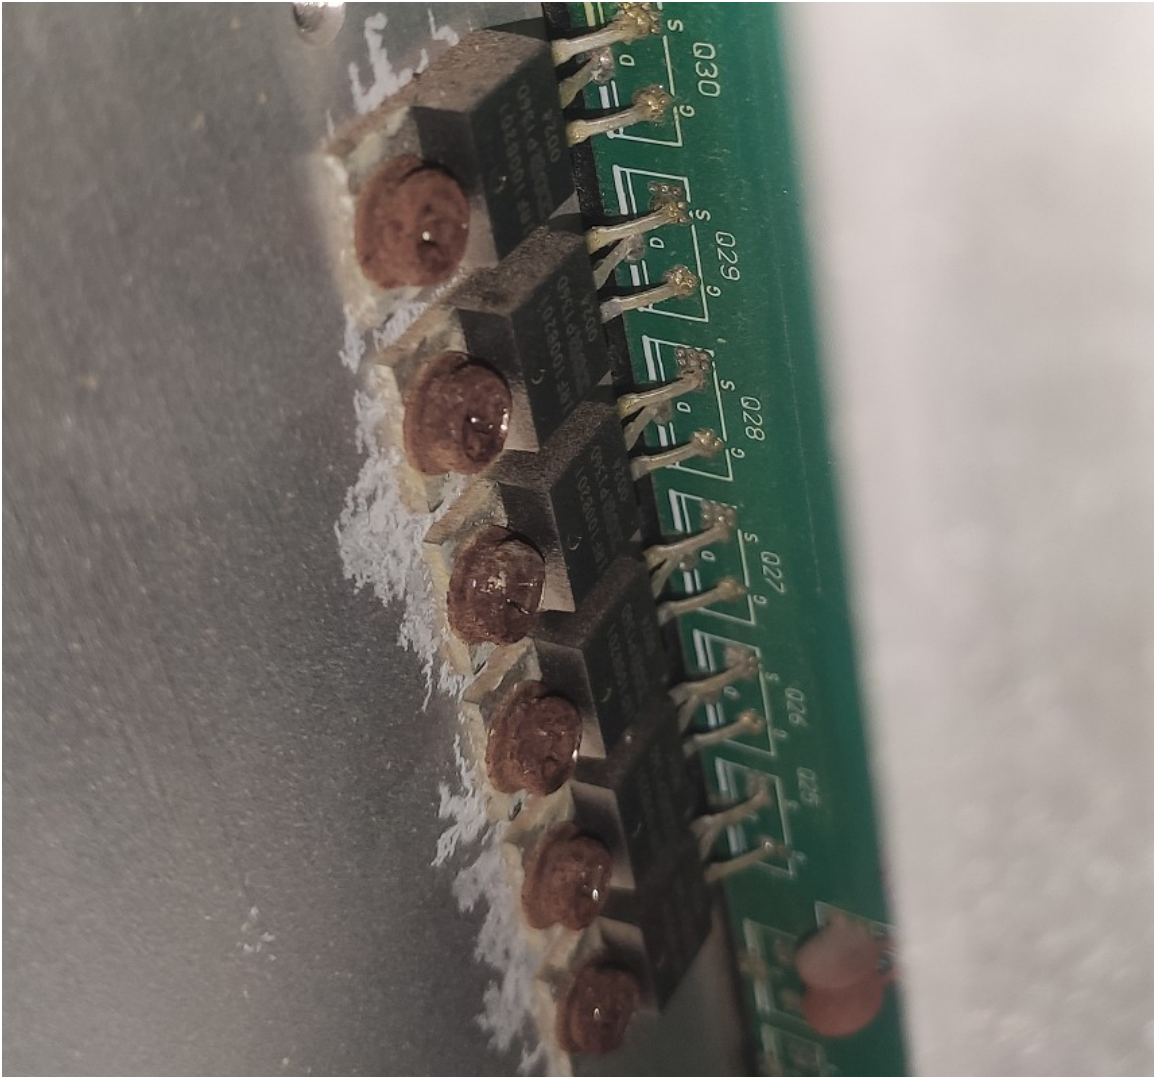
IMAGE SHOWS SHORT CIRCUIT TO HOUSE GROUND. 67ohms
